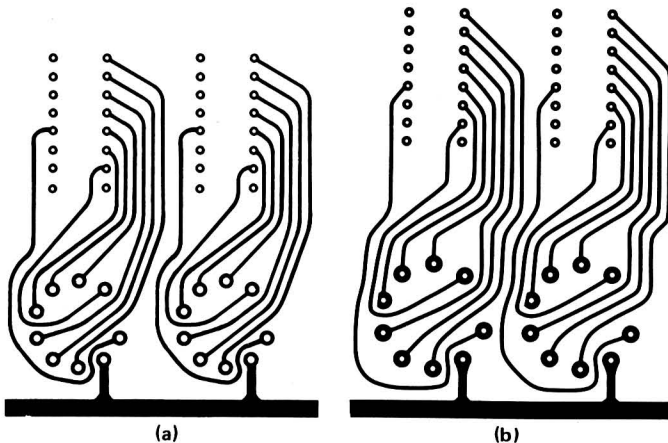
Printed-circuit-board layouts for two NUMITRON devices and associated CD2501E integrated-circuit decoder/driver: (a) direct-mounting arrangement; (b) with NUMITRON devices mounted in a commercial socket.
